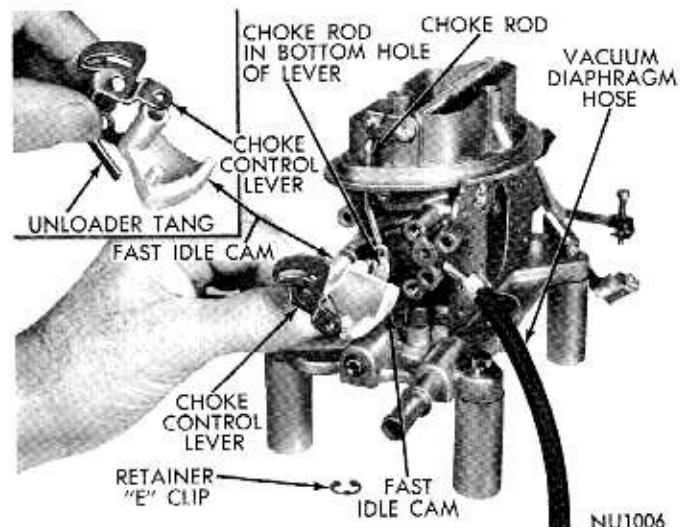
Removing or Installing Choke Control Lever and Fast Idle Cam
